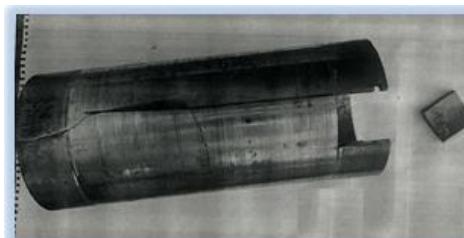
Sample 1. Pump bushing wear DV 2-87
